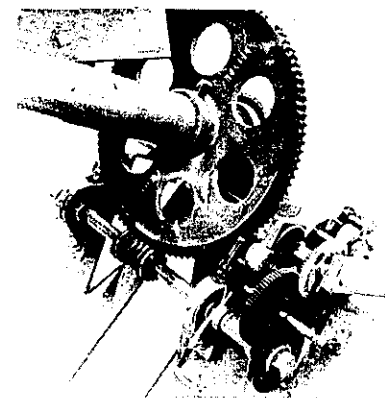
The drive assembly for the polar axis. Near the large gear is the differential motor which turns a set of gears adding to the speed of the drive itself. On the back is the 4 watt motor for the main set of gears. The gear in the foreground can be disengaged (as it is shown) to permit the manual turning on the right ascension axis. The two motors are hooked up to switches which are held in the hand while observing.
